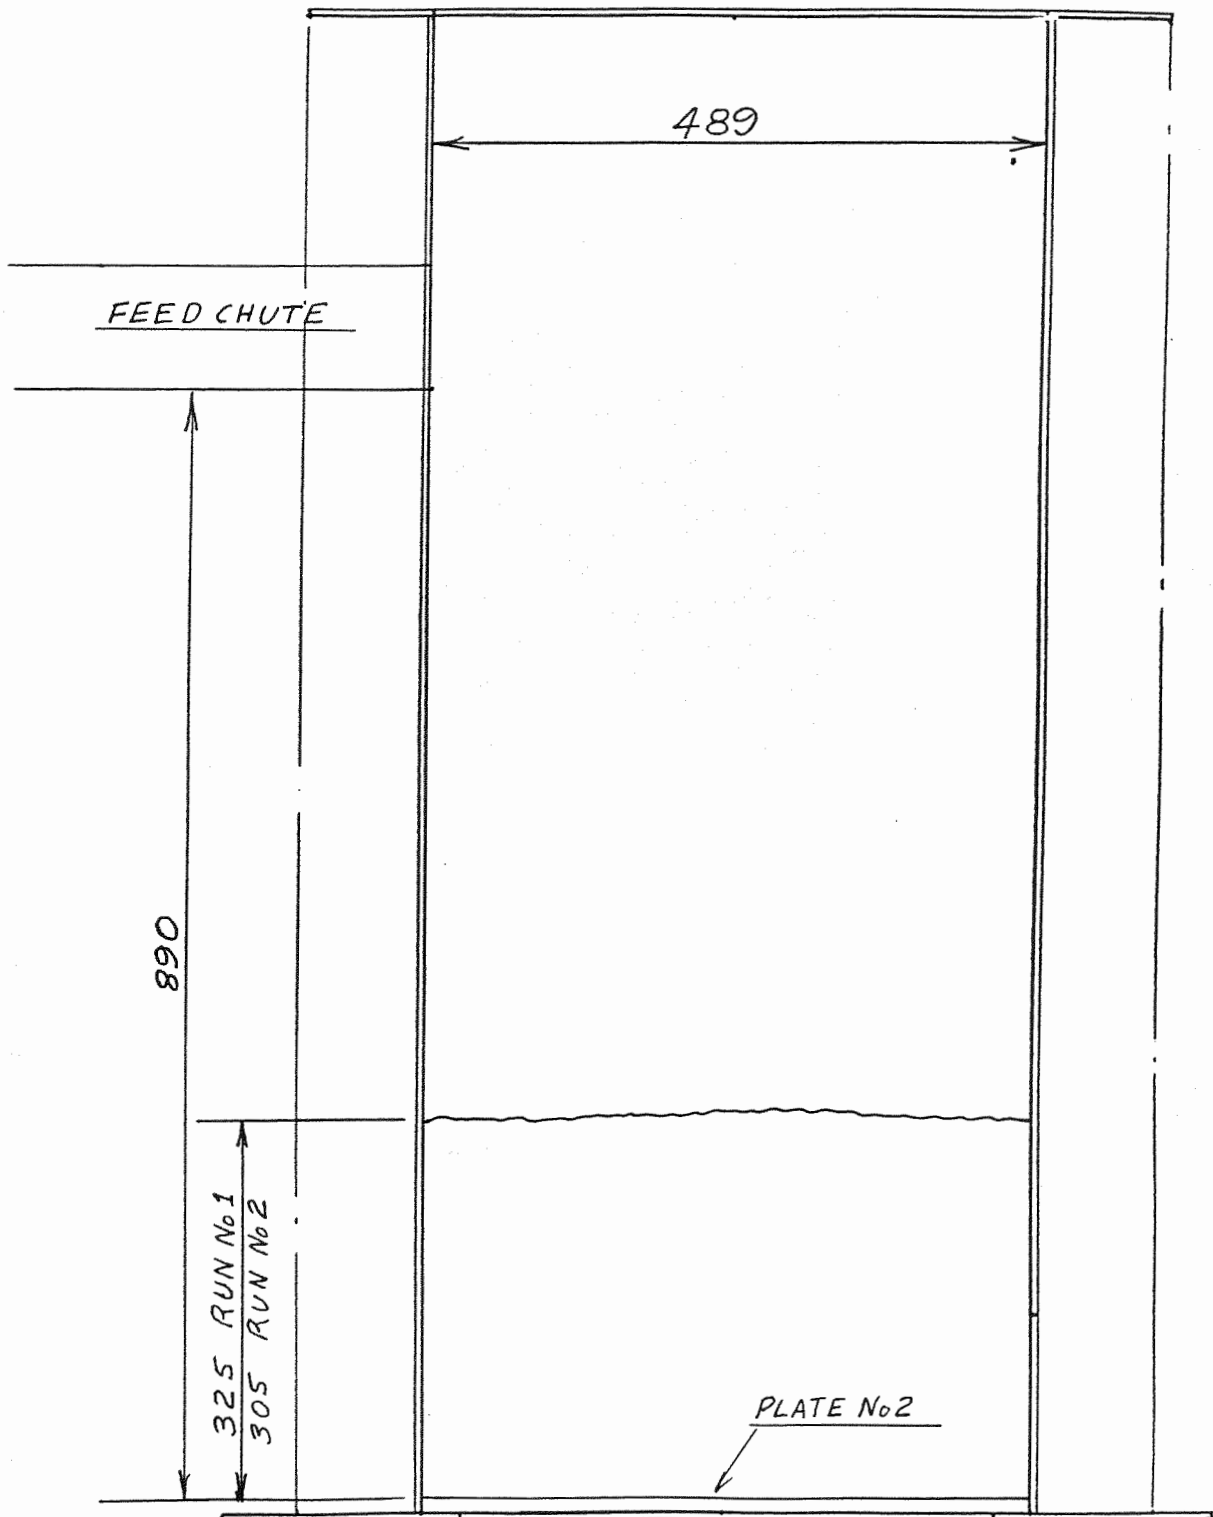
Combustor Tube Details, Combustor Run 3
